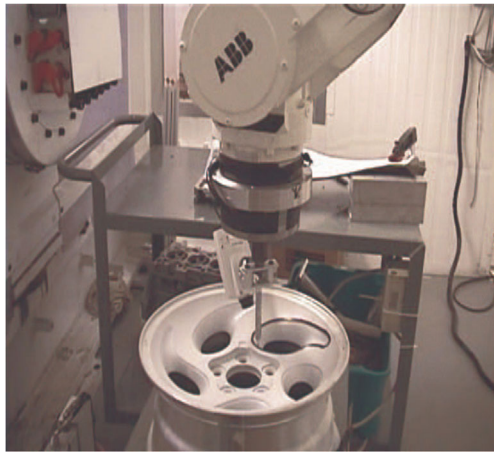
A deburred and polished aluminum wheel (Adapted from [112])
